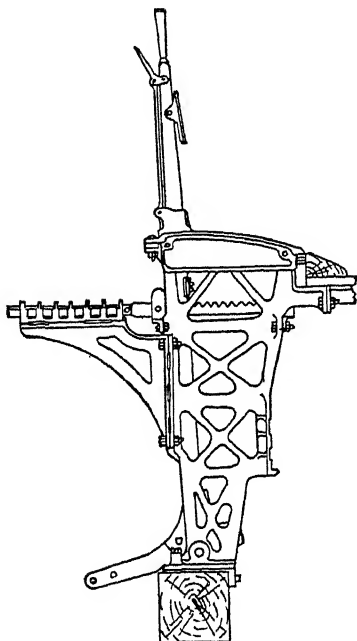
Locking Frame fitted with Sykes Tappet Gear, Southern Railway (Brighton Section)
